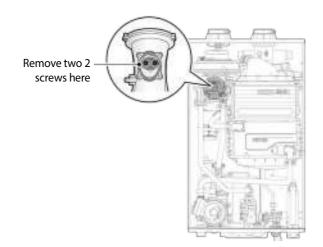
Detaching Gas Valve from Gas Inlet Pipe and Fan Motor Assembly
